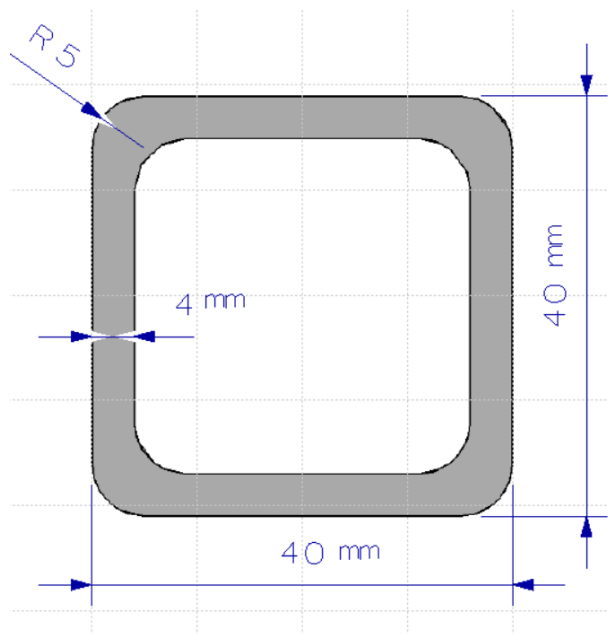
Cross section of 40 x 40 x 4 mm steel profile
